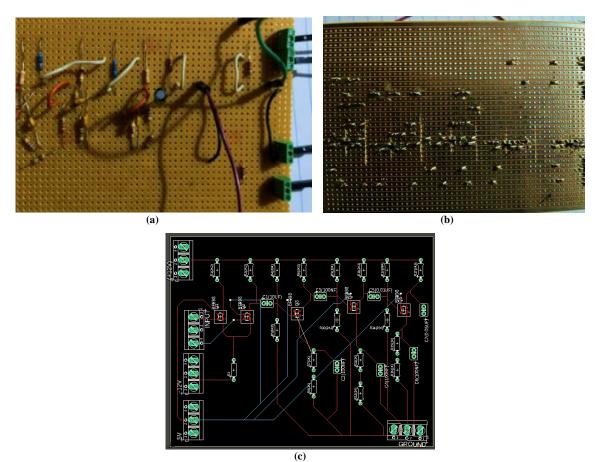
Prototype (a) Top view, (b) Bottom view, (c) fabricated structure of the 4-stage op-amp using DG MOSFET
